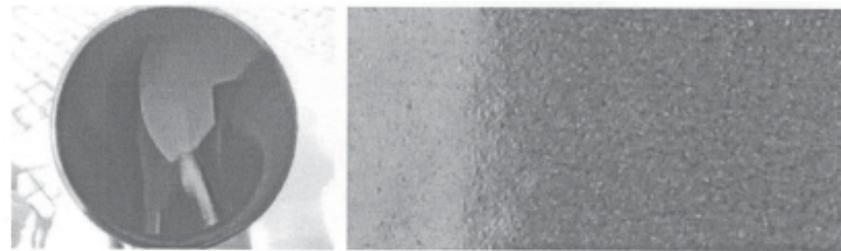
Bend 90°2D 168.3 x 4.5 mm with combined PEMCO frit, general view and interior detail
